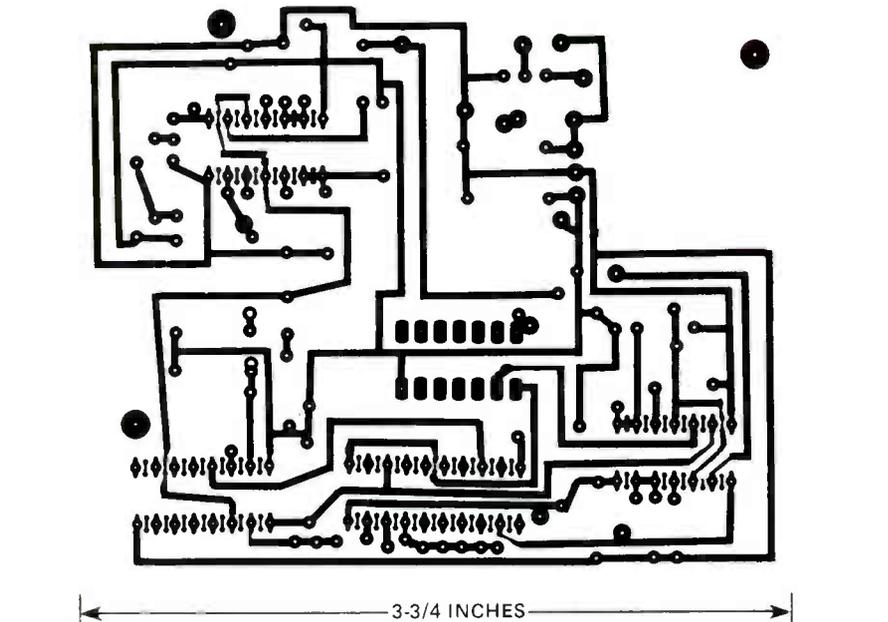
HERE'S A FOIL PATTERN you can use if you wish to build the project on a PC board. Note, however, that almost any construction technique can be used.
